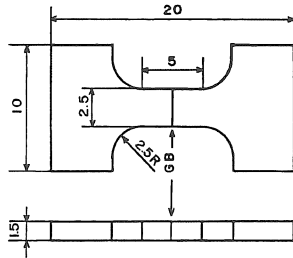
Shape and dimensions of Cu-Al-Ni bicrystals.
